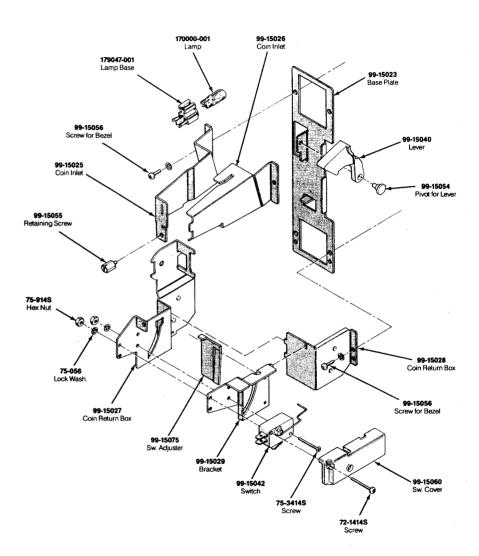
Coin Acceptor Coin Door Assembly 171034-xxx A
